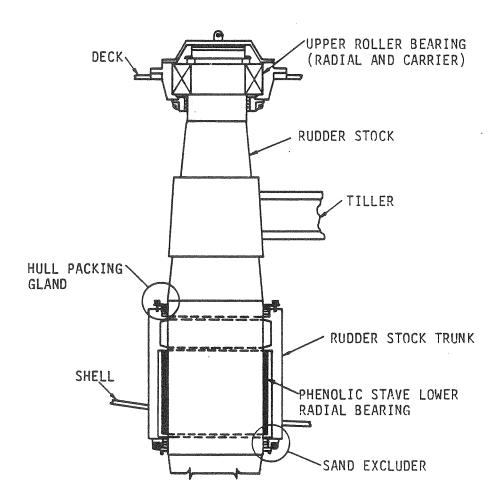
RUDDER STOCK BEARING TYPICAL ARRANGEMENT "C"
